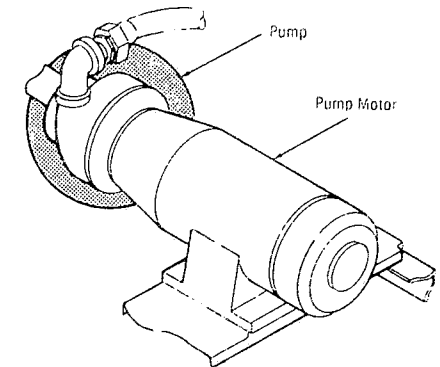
CHECK FOR LEAKS IN PUMP SHAFT SEAL.
